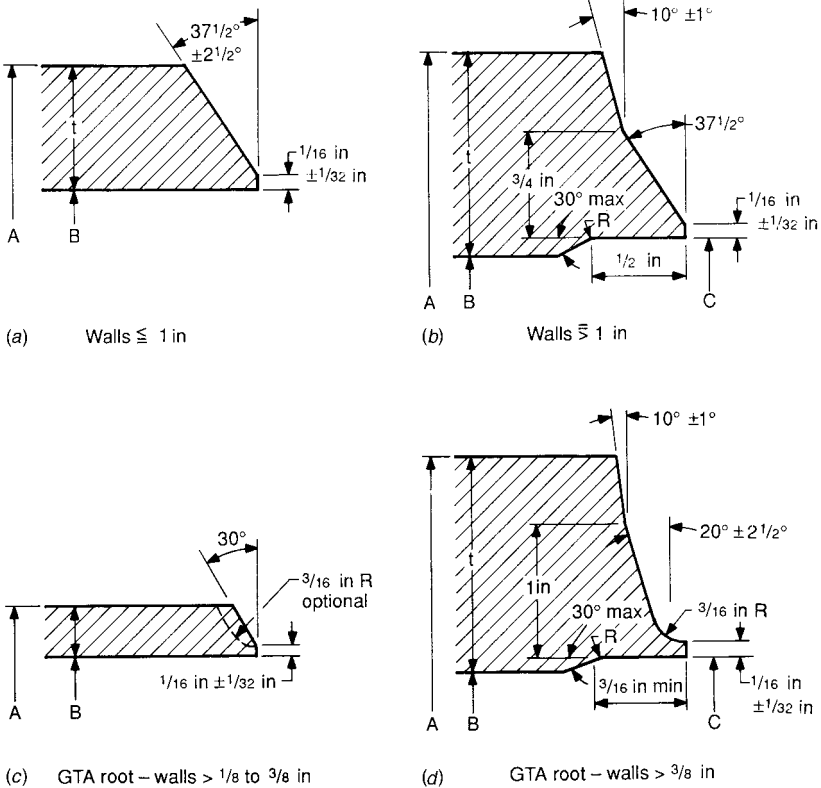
Typical weld end bevels. (a) Walls ≤ 1 in; (b) walls > 1 in; (c) GTA root walls $> 1/8$ to $3/8$ in; (d) GTA root walls $> 3/8$ in.
